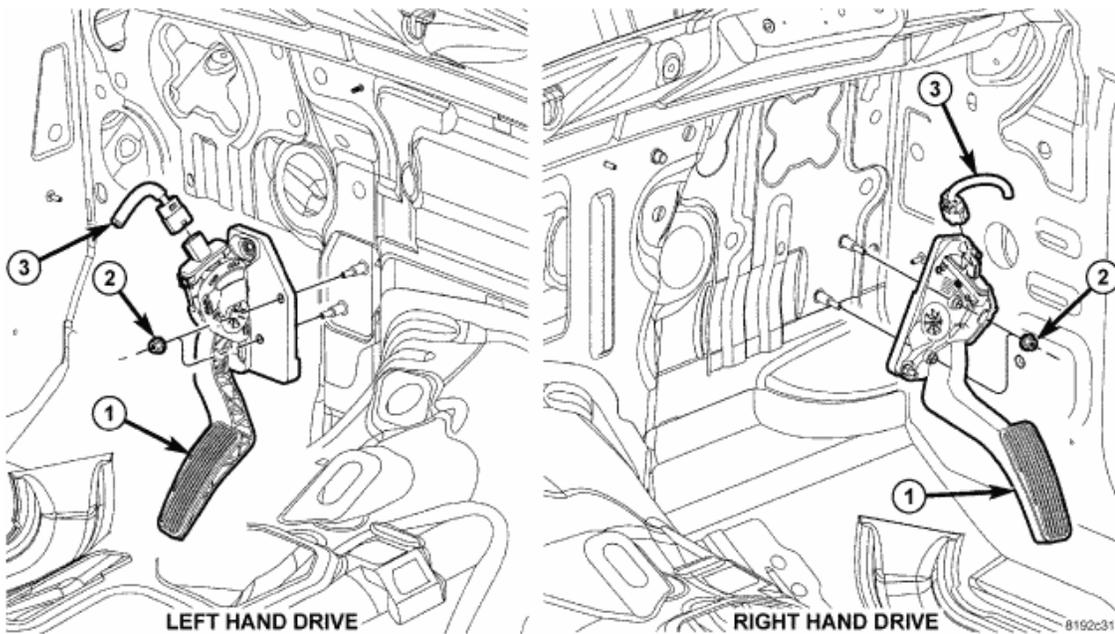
Accelerator Pedal - Without Accelerator Pedal Position Sensor
